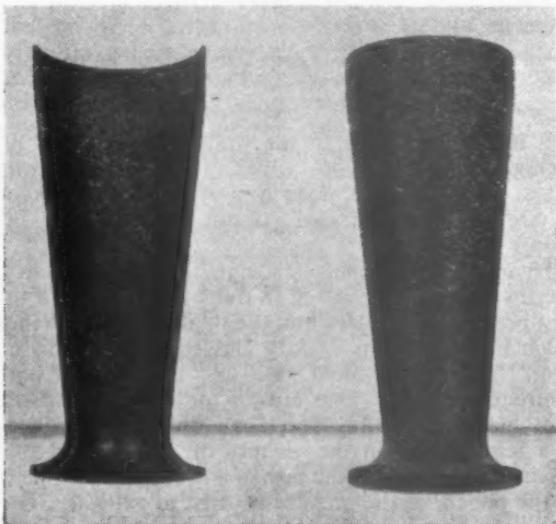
External view and section of rocket venturi tube deep-drawn from $\frac{1}{4}$ inch thick mild steel. Only light local machining is needed to finish this component. (Courtesy of Hague & McKenzie, Ltd.)
